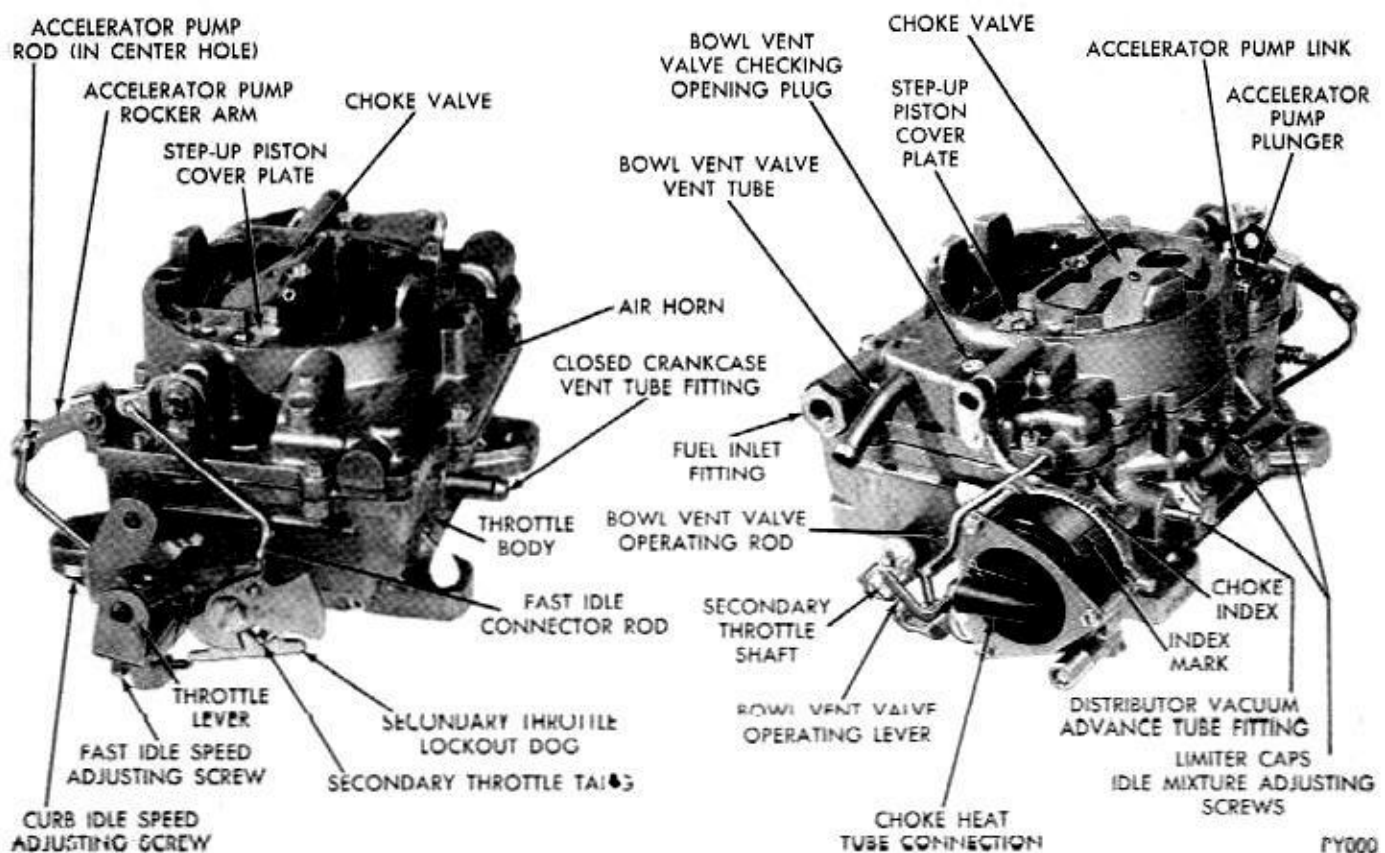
Carburetor Assembly AFB (E.C.S.)
